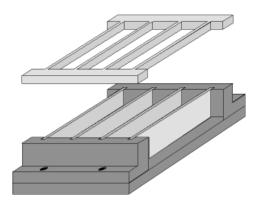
MOULD WITH OVERFILL RING FOR HMOR TEST SPECIMEN PREPARATION
